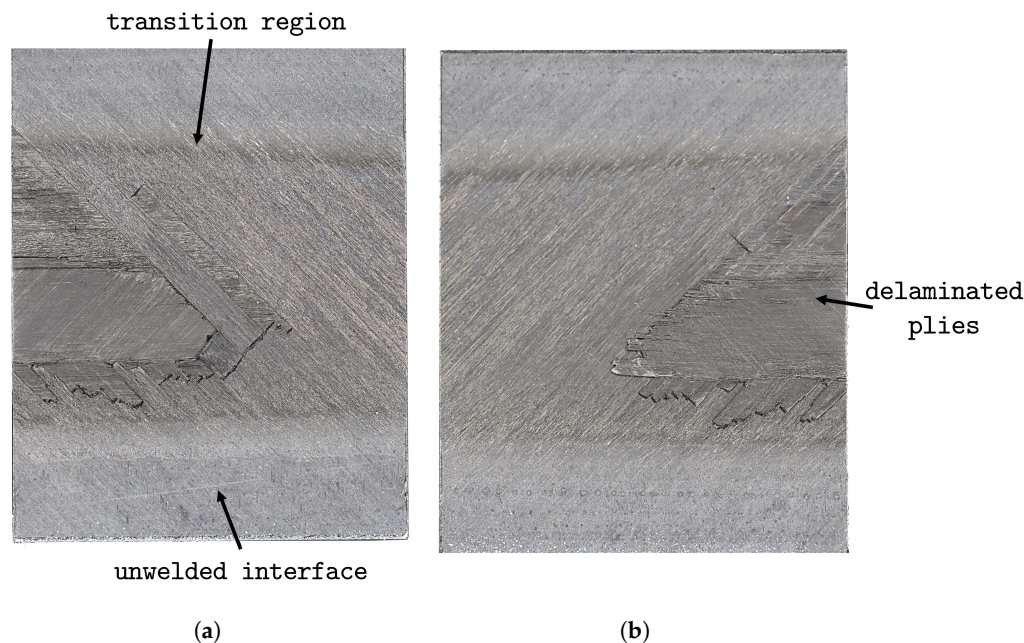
Fracture surfaces of specimen G3 on the (a) top and (b) bottom adherend.
